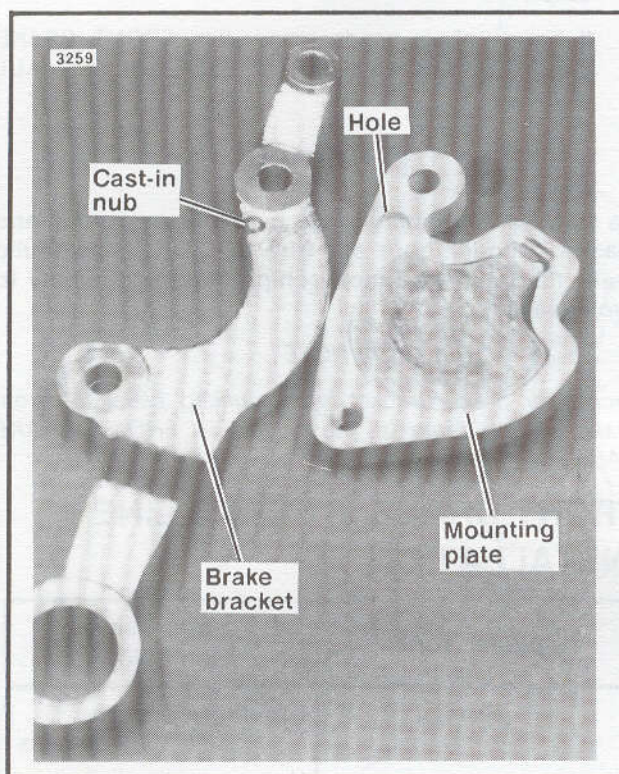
FXSTS Brake Bracket & Mounting Plate
